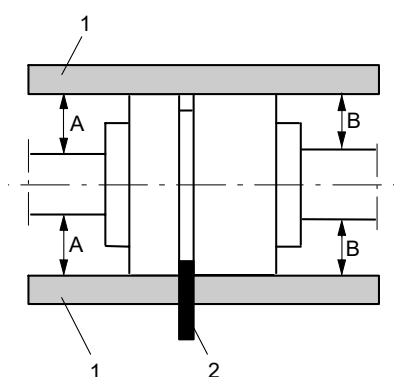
Non-spacer-type coupling, checking the coupling alignment
